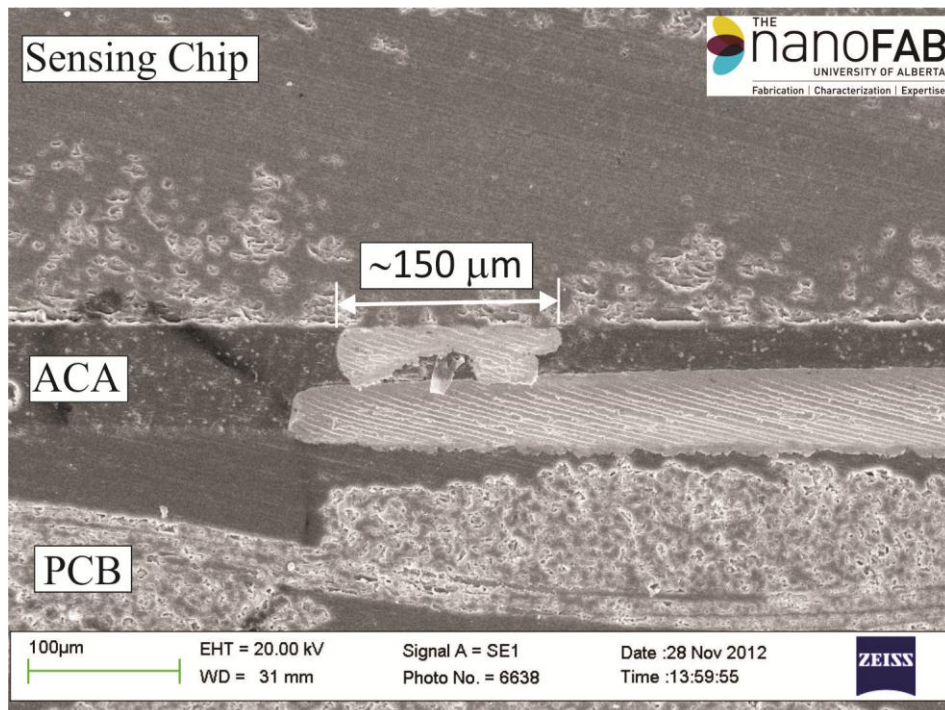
SEM image of the PCB/Chip cross-section showing the width of one coined gold bump
